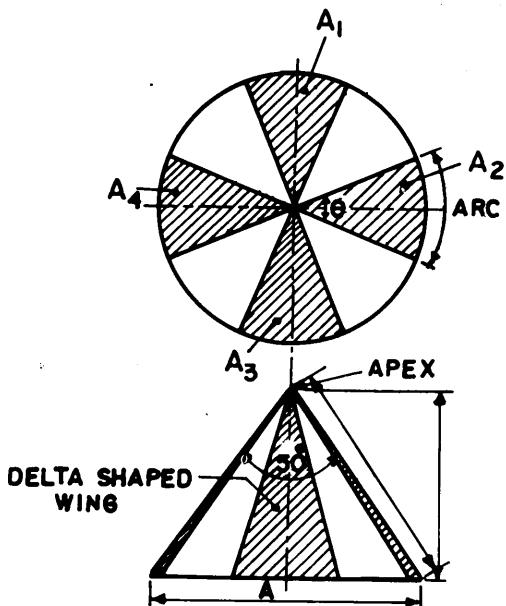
ELEVATION AND PLAN OF TURBULENCE GENERATOR SYSTEM
